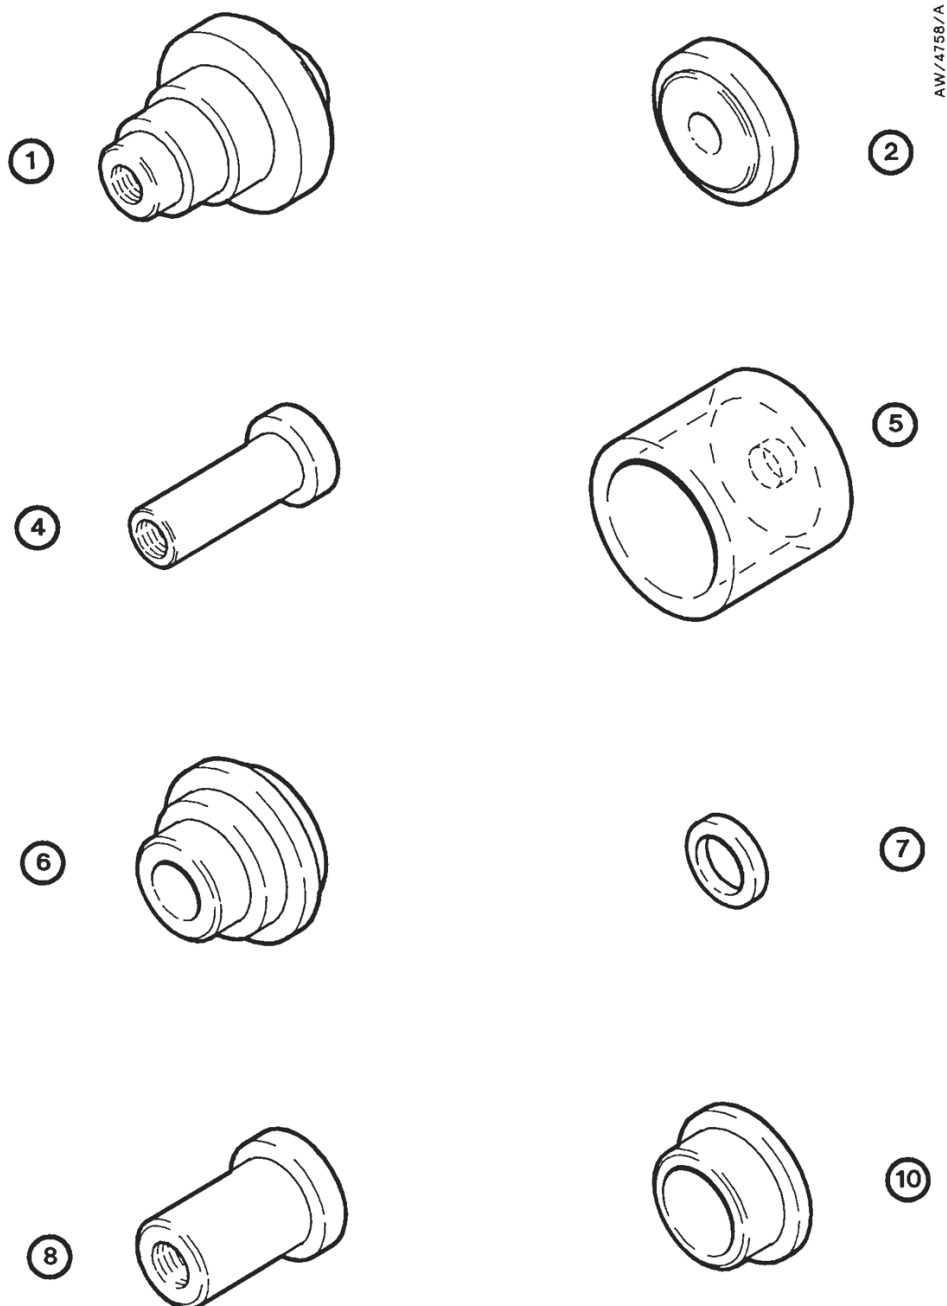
ESDP12 Special Tools: Sheet 2 of 2
